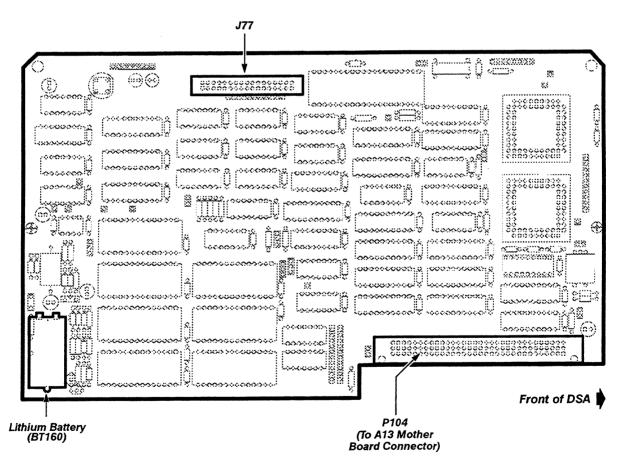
Removing/Replacing the A17 Main Processor Board
